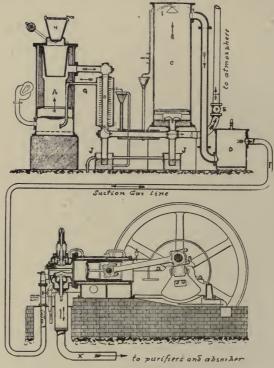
SUCTION GAS PRODUCER AND ENGINE.
